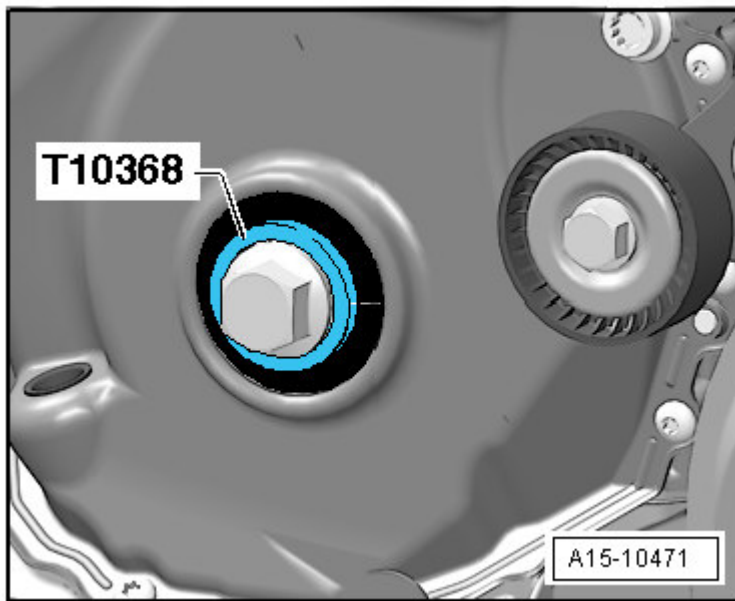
Identifying Vibration Damper Bolt And Thrust Piece T10368
